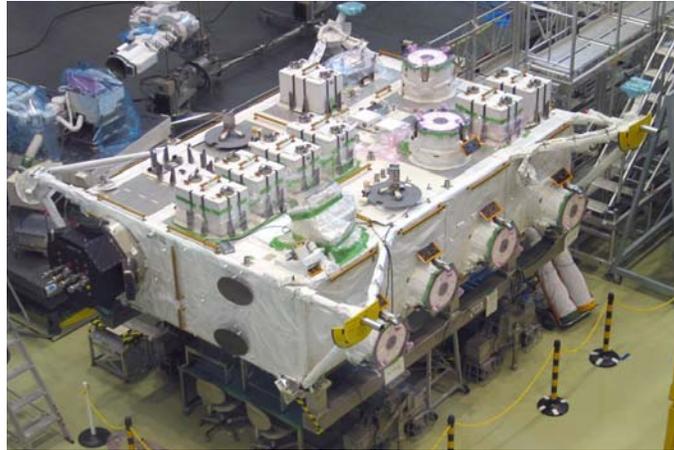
JEM-EF under construction at JAXA Facility in Tsukuba, Japan.
